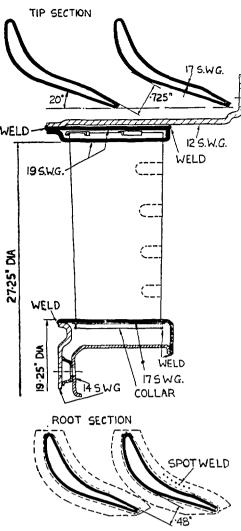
Turbine nozzle assembly (shaded parts in mild steel)
